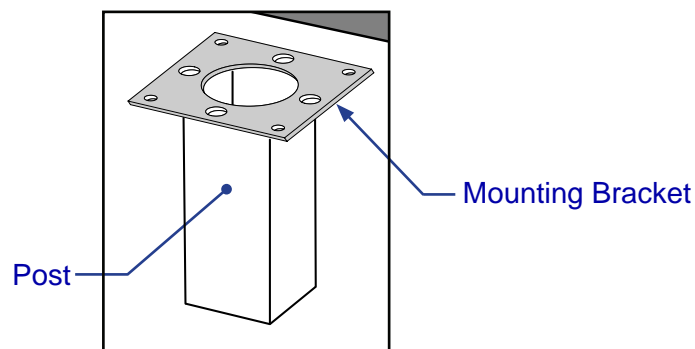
Weld Mounting Bracket To Post
